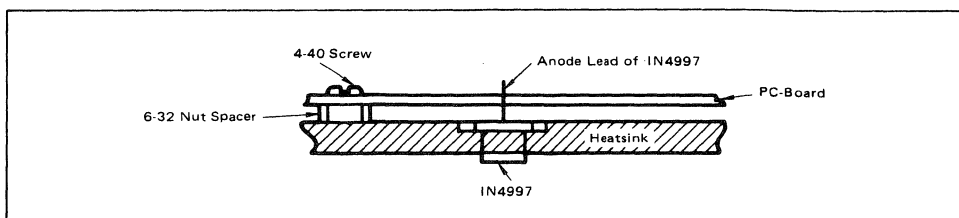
Mounting Detail of IN4997 and 6-32 Nut (Spacer)
